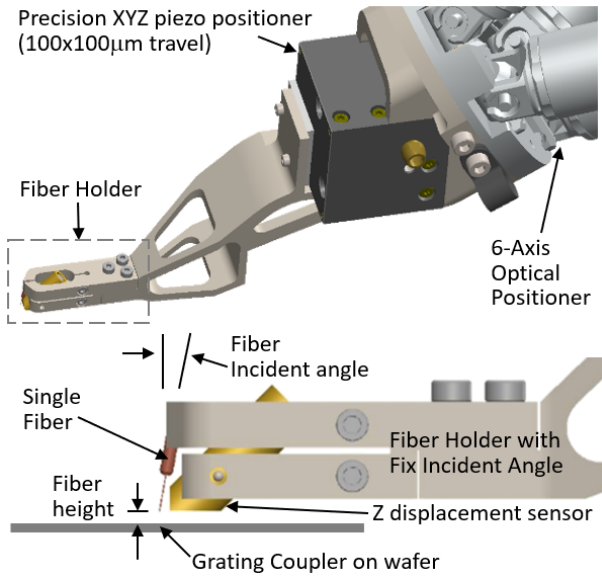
6-axis piezo positioner, side view of fiber holder with single fiber and Z displacement sensor.
